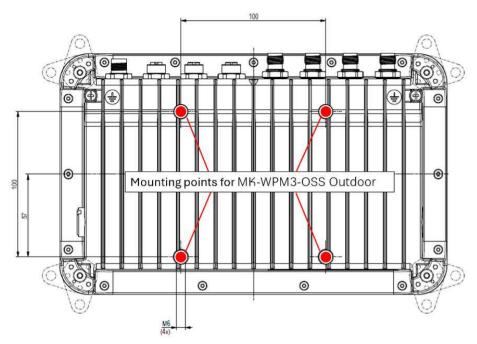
Mounting points on the reader rear panel for mounting the Kit MK-WPM3-OSS Outdoor 52010351
